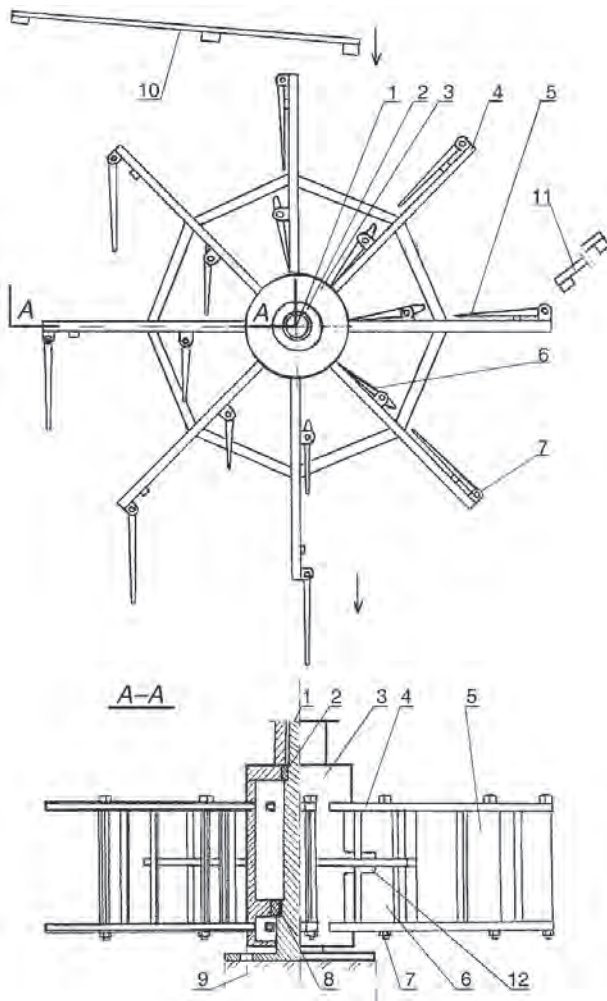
Schematic cross-section and axial turbine rotor assembly of the wheel water turbine with the current steering: 1 – shaft set on a foundation, 2, 8 – bearings, 3 – a rotating cylinder mounted on bearings 2 and 8, 4 – arms in the form of frames, created from two longitudinal elements instructed the cylinder 3, 4a – transverse axial coupling elements booms 4, which are support for the free blades 5 and 6, 5,6 – blades mounted rotationally, 7 – hinges on which the blades are mounted to the arm 4, 12 – chosen room for switches of the blades during rotation 6 of the boom 4
